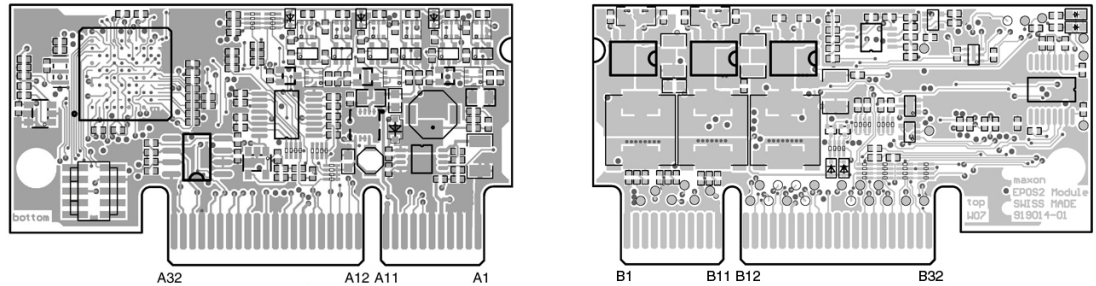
EPOS2 Module 36/2 – PCB with Connector Array
